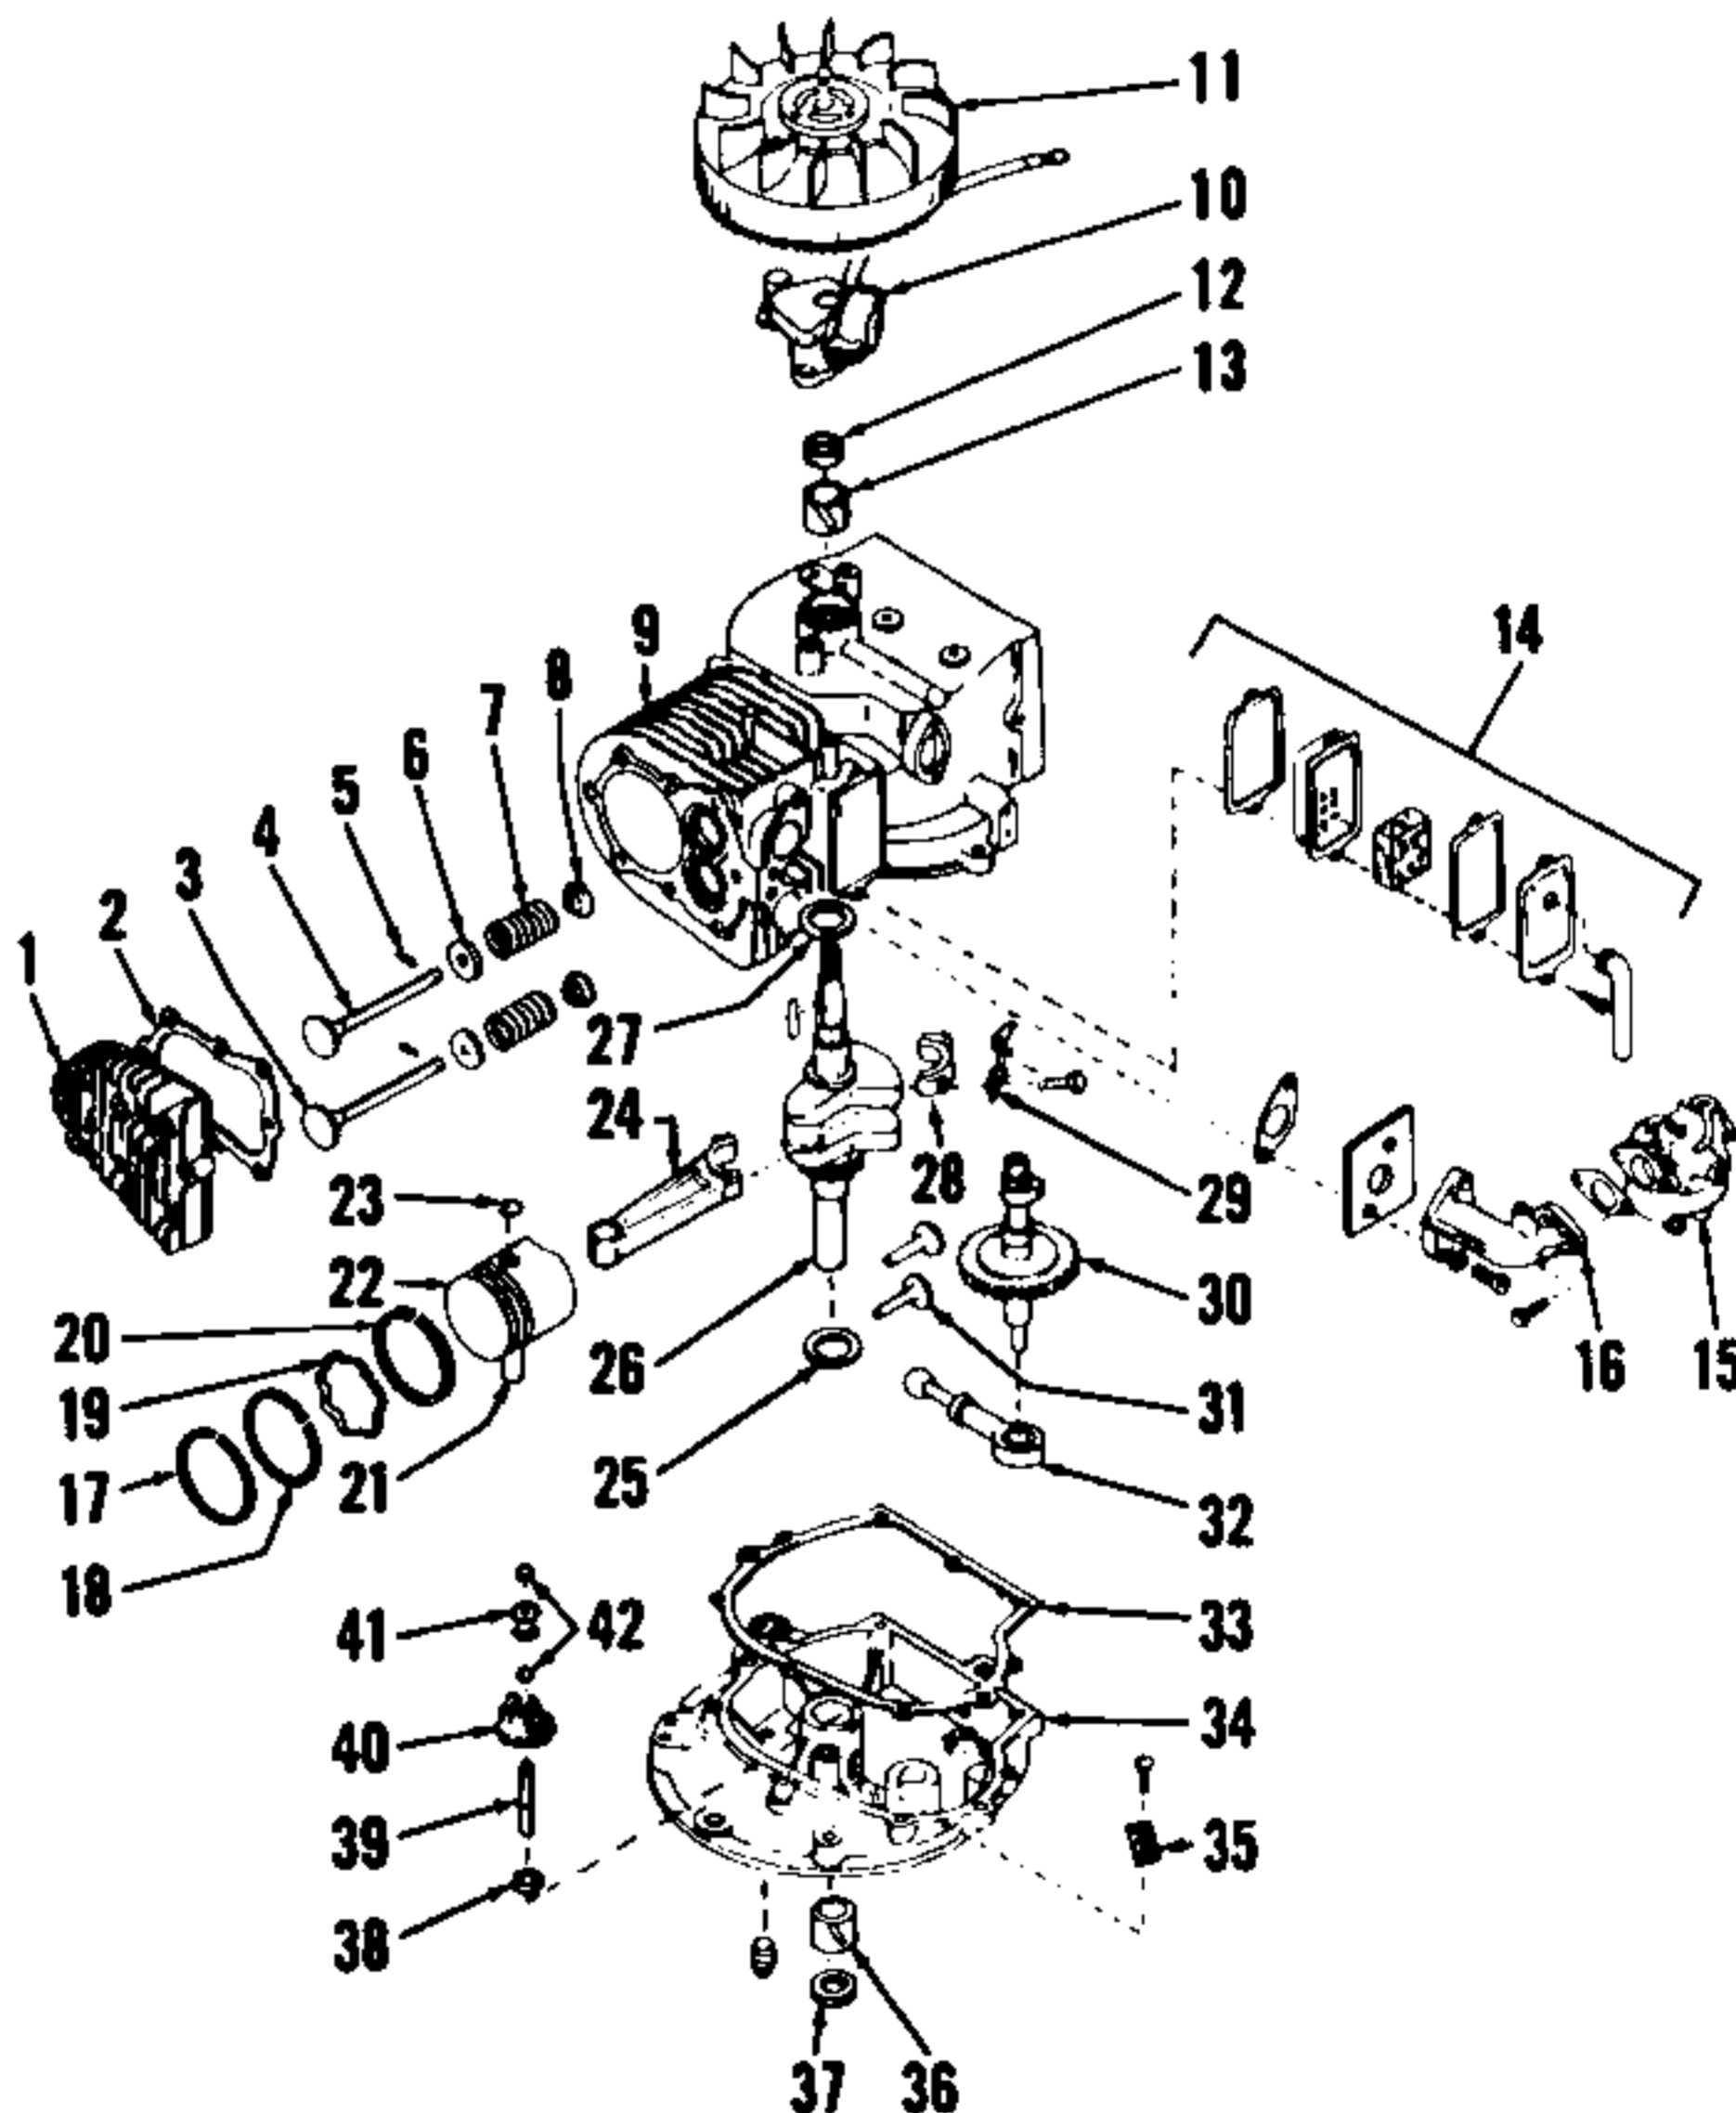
Exploded view of vertical crankshaft engine typical of Models VH70, VM70, VM80 and VM100. Renewable bushings (13 and 36) are not used on Models VM70, VM80 and VM100.
